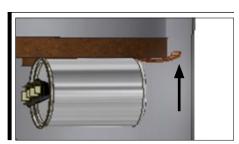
| Be sure ground clip is facing up and at a 90 degree angle from motor when installing motor into housing.
